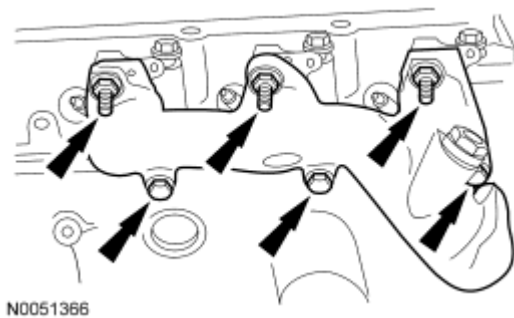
Locating Stud Bolts, Exhaust Manifolds & Gaskets
